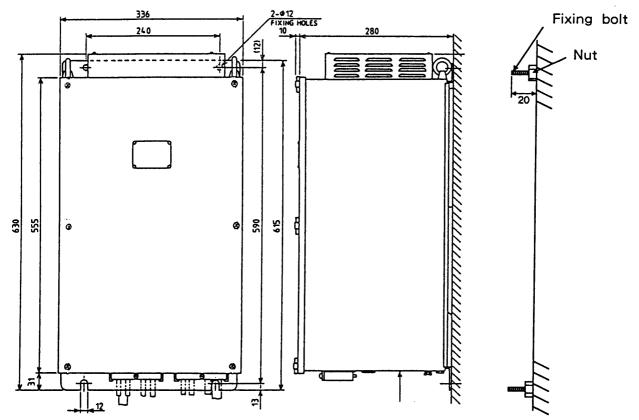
Transceiver Unit Mounting Dimensions (Vertical Mounting)
